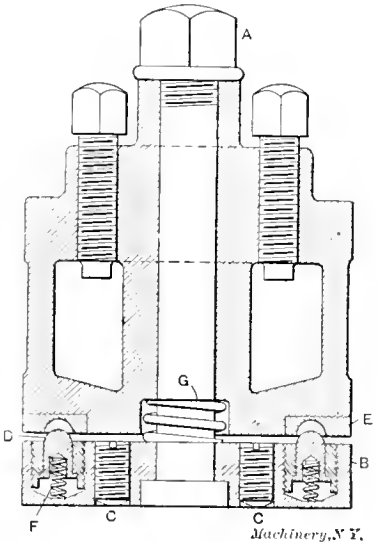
Sectional View of the Brewer Multiple Tool-holder
